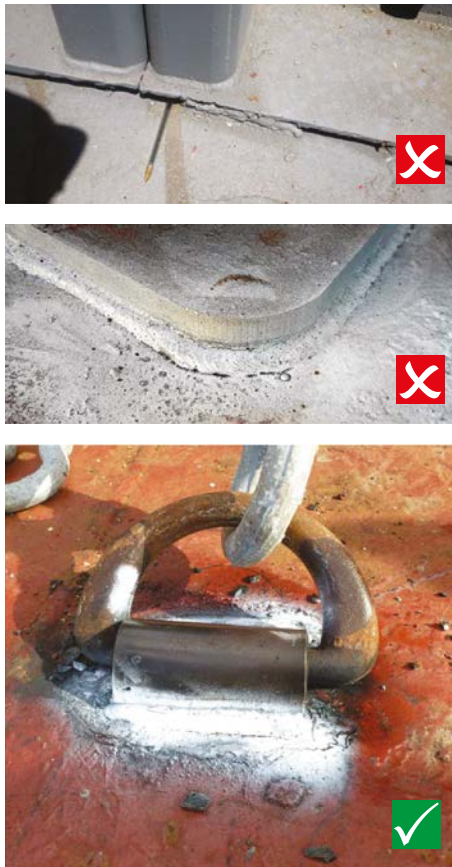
Examples of welds, showing very poor quality welding (top), a sea fastening weld to the deck that failed the NDT inspection due to the presence of weld cracks (middle) and a D-ring after NDT inspection that was passed (bottom).
